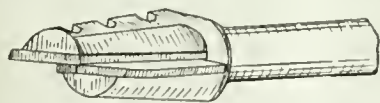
SPADE TOOL FOR FINISHING INSIDE OF BASE.
